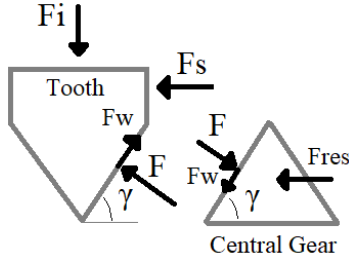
Free body diagrams from the integrated concept of dual gear stepper. A tooth of the central gear is shown, and a tooth that is actuated by the bellow with force  $F_i$ .
